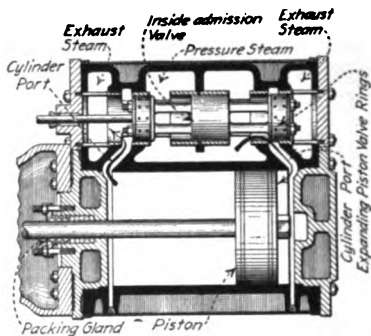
Section through cylinder of Erie-Ball piston-valve engine.
